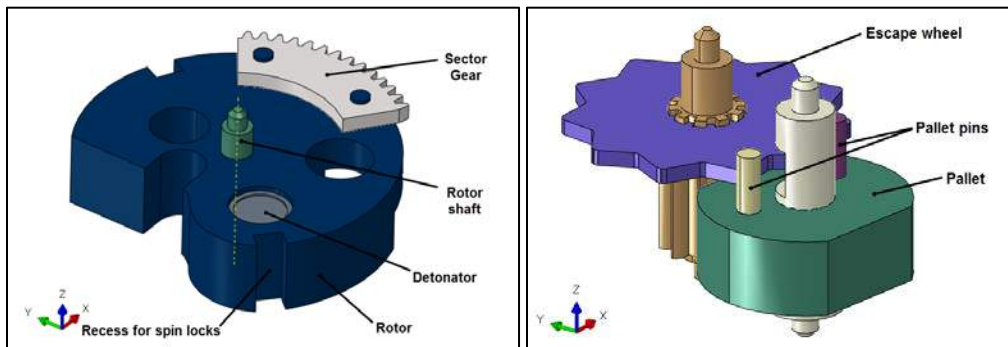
Initial rotor and runaway escapement model of S&A Mechanism.
